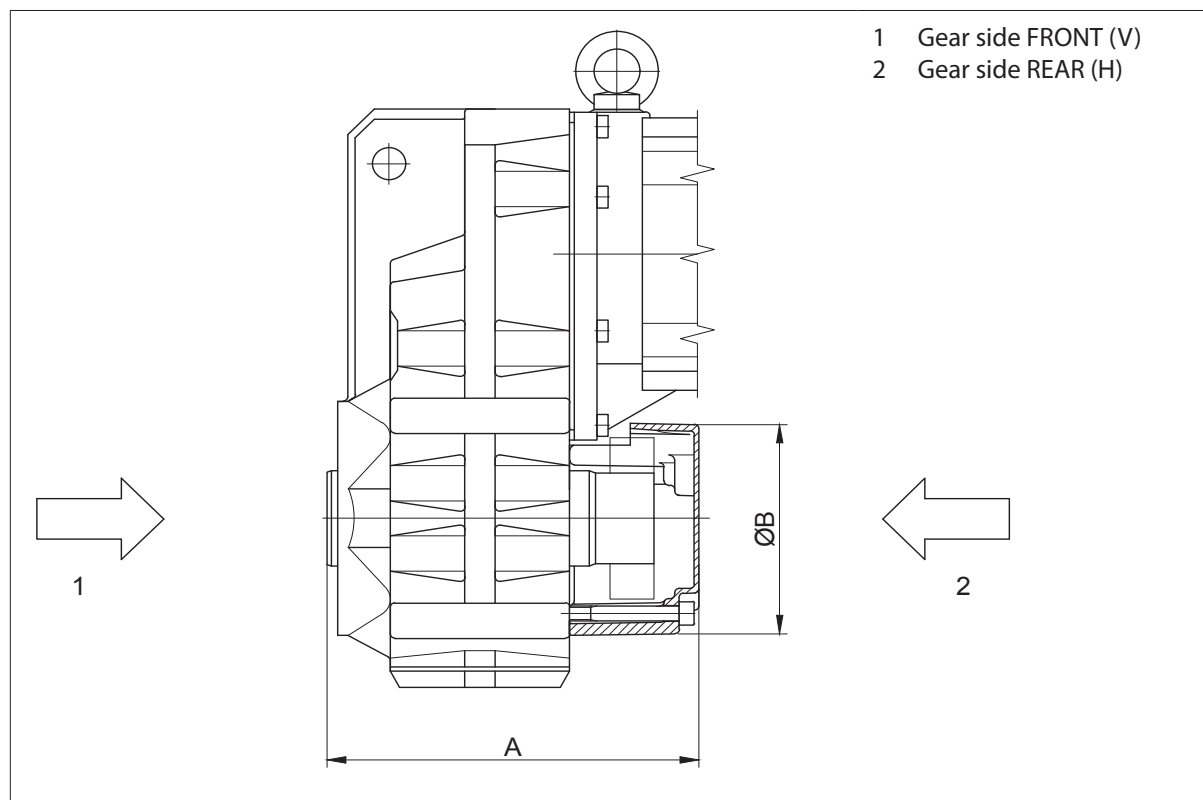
SSV cover for shaft-mounted gearbox BF10 ... BF90
